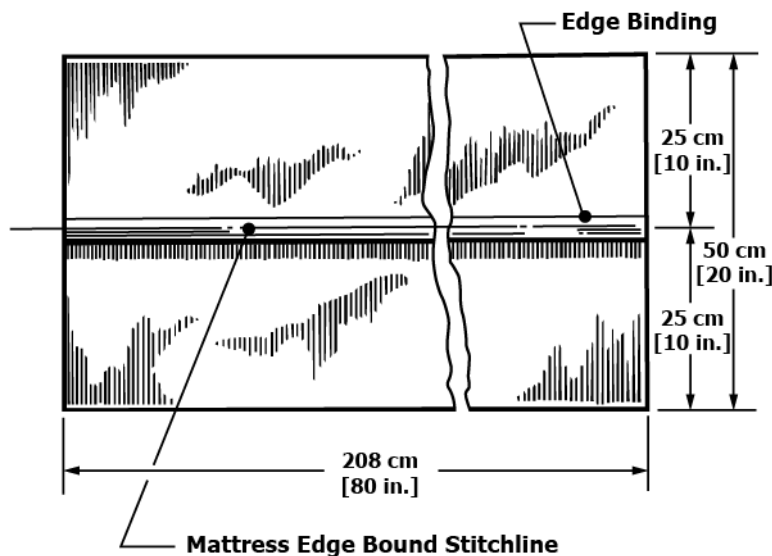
Mattress Edge Bound Sample—Front Sample – Front View
